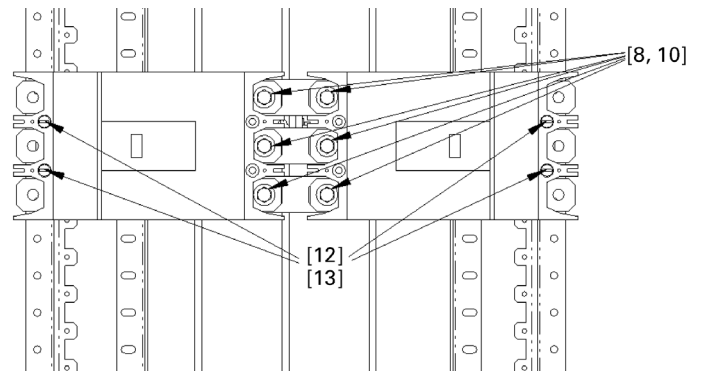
Installing the circuit breakers on the mounting brackets and strap blocks.
